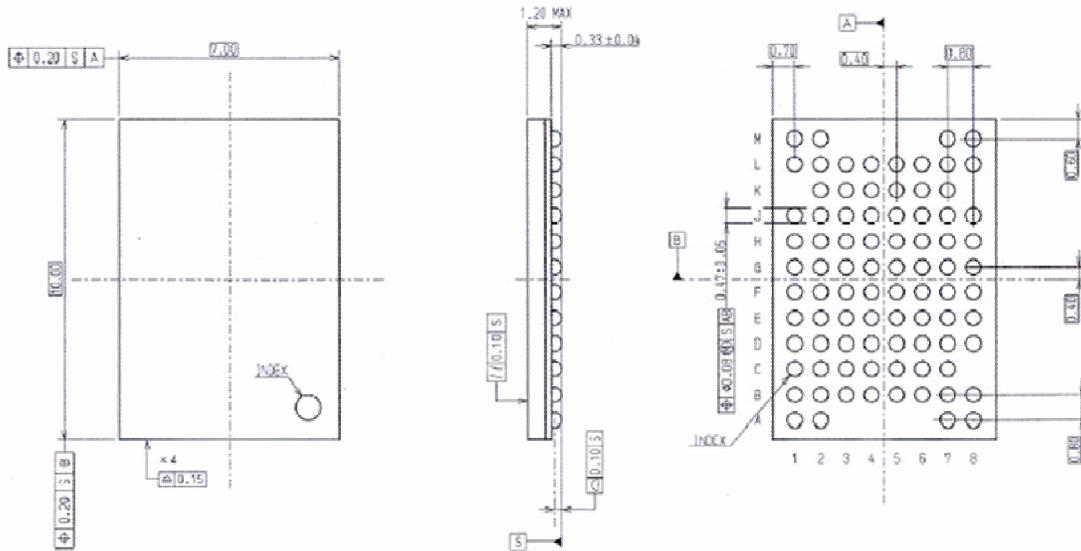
Mechanical Dimensions 7x10 FBGA Package
